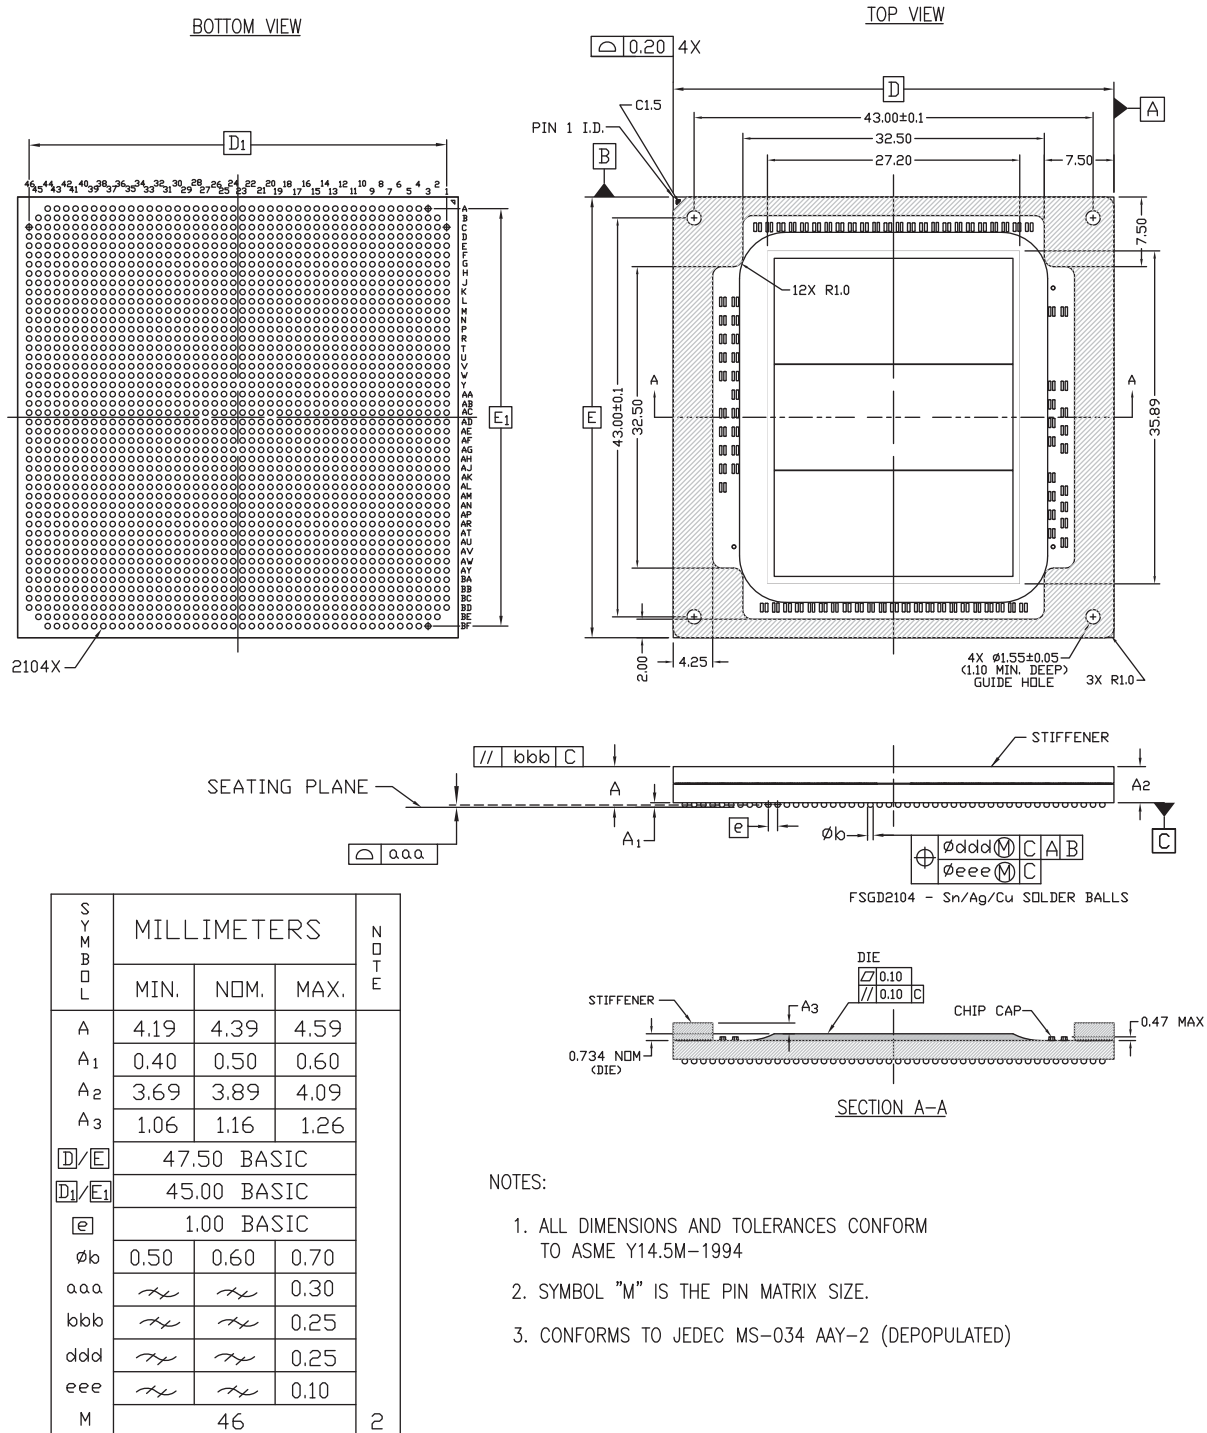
Package Dimensions for FSGD2104 (XCVU9P)
